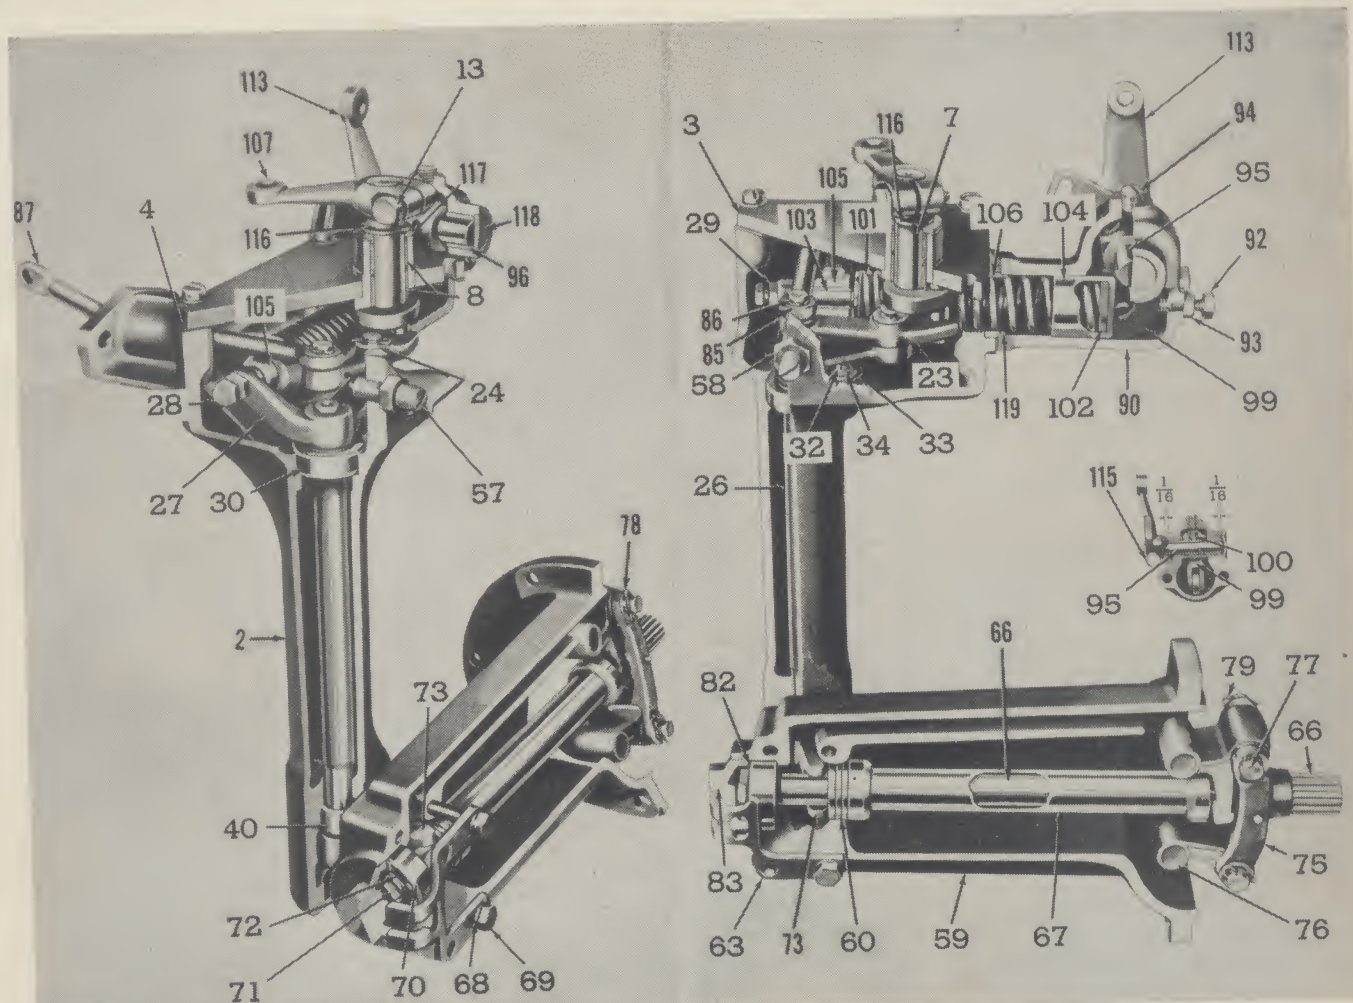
A—A variable speed type governor is installed on the GM engines used in the Oliver Super 99 GM tractor.
